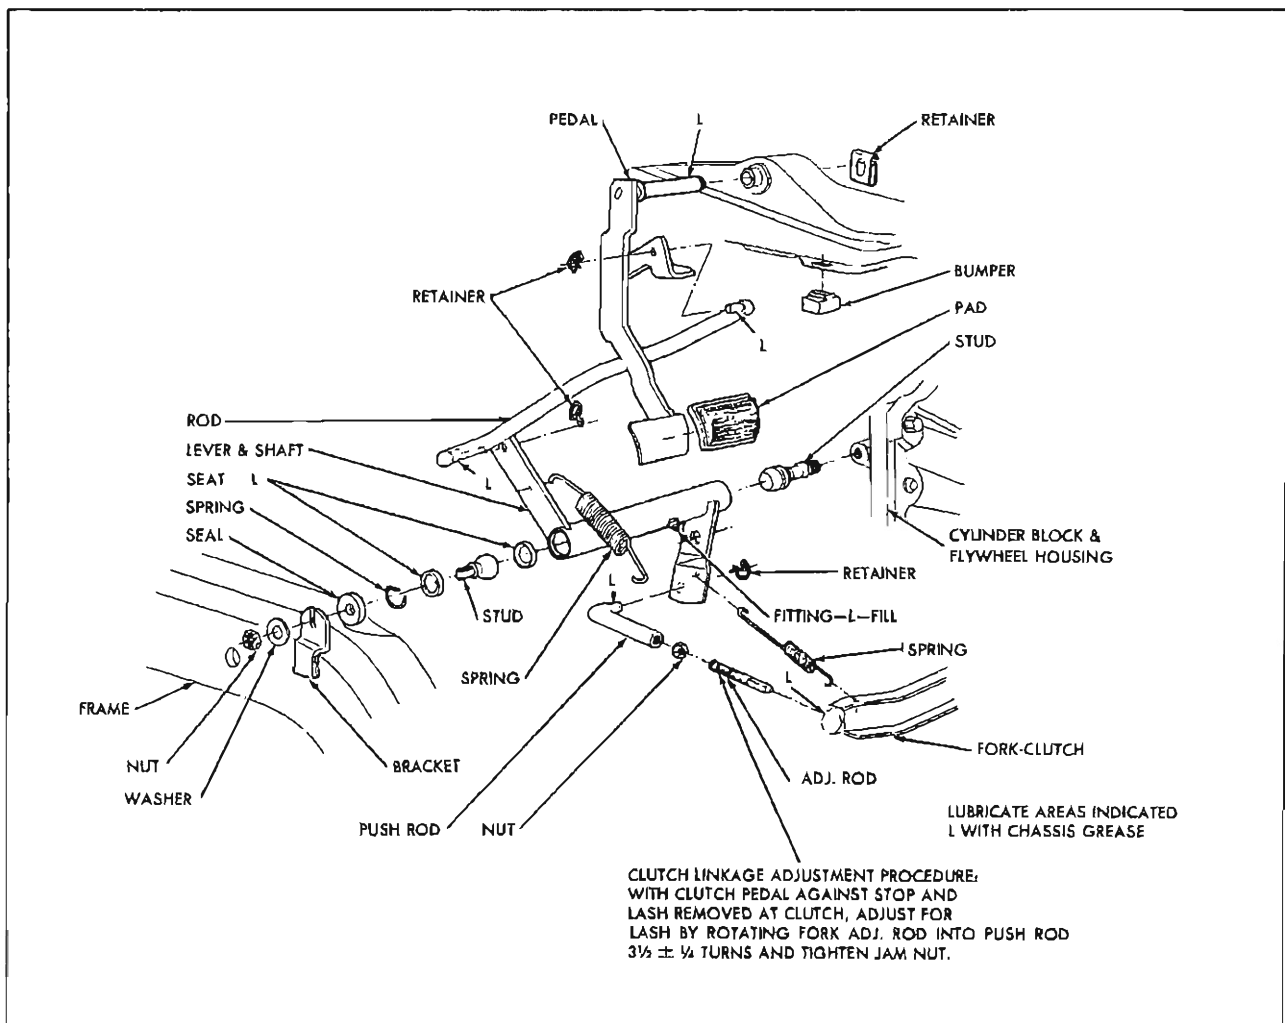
D-2 Clutch Control Linkage - 6 Cylinder
